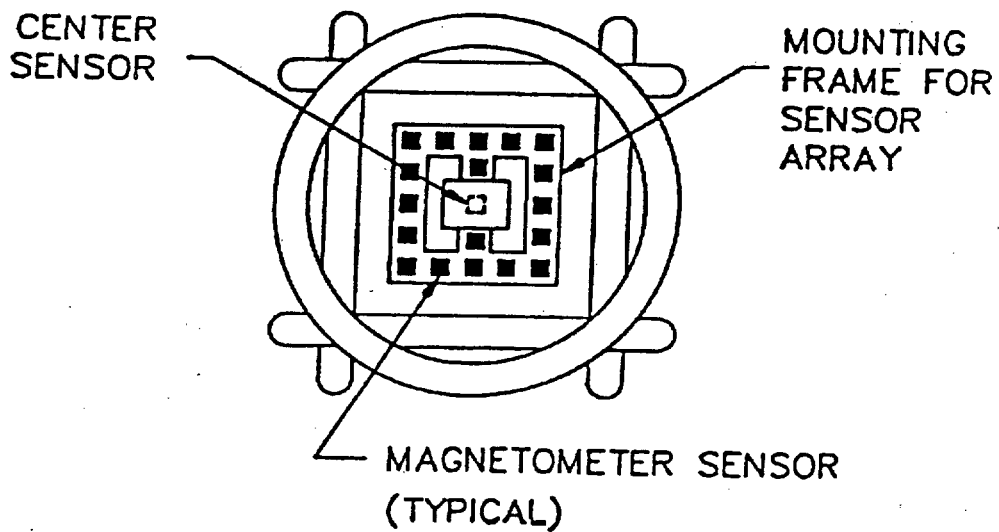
Mounting frame for magnetometers' sensors.
